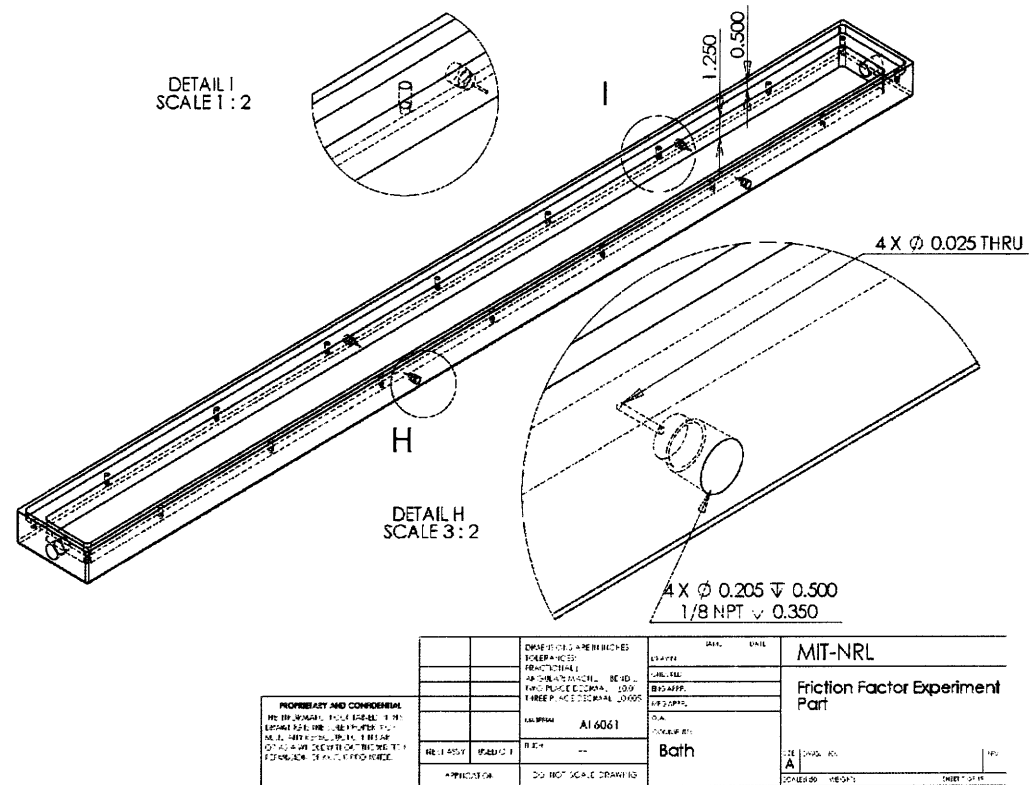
Test assembly part – 4 tap holes on two sides of the test section.
